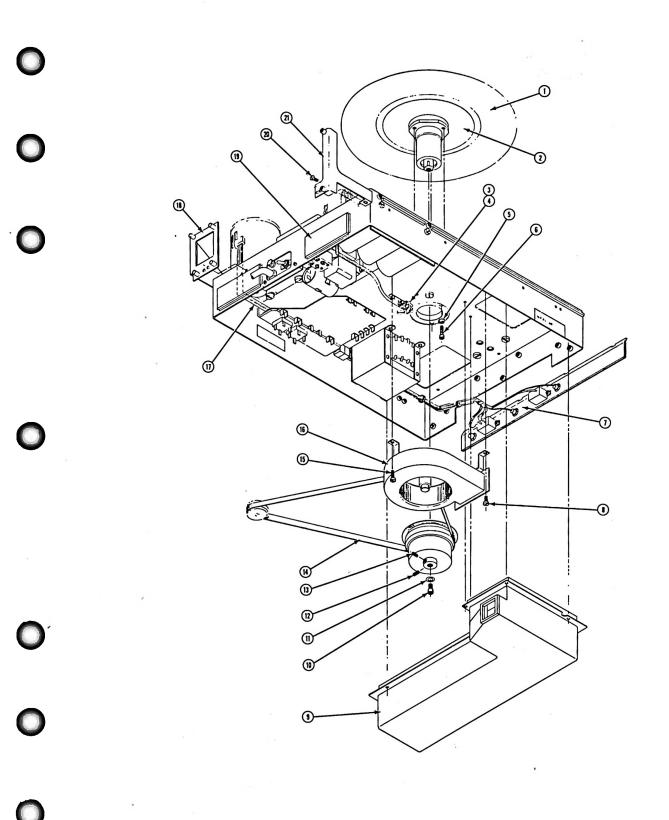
Chassis Assembly, Bottom View (74770) Revised: July 15, 1976
